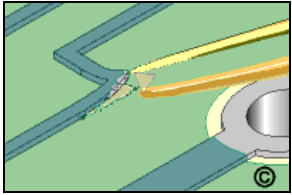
Cut out a piece of Bonding Film and place it under the lifted conductor.
